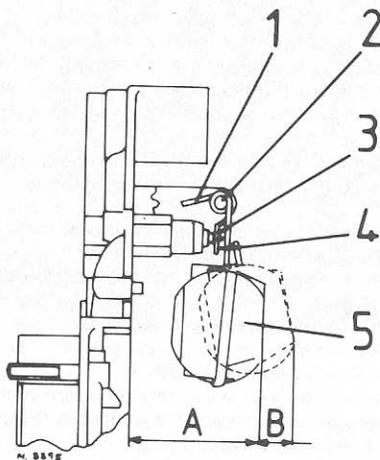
Checking the float level adjustment (DFV, DFAV, DGV, DGAV types) (Sec 7)
